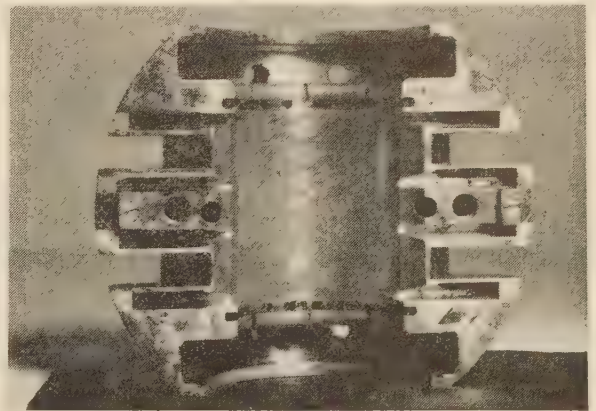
LOWER BEARING SHELL FOR FORCED-VENTILATED OIL-RING JOURNAL BEARING
